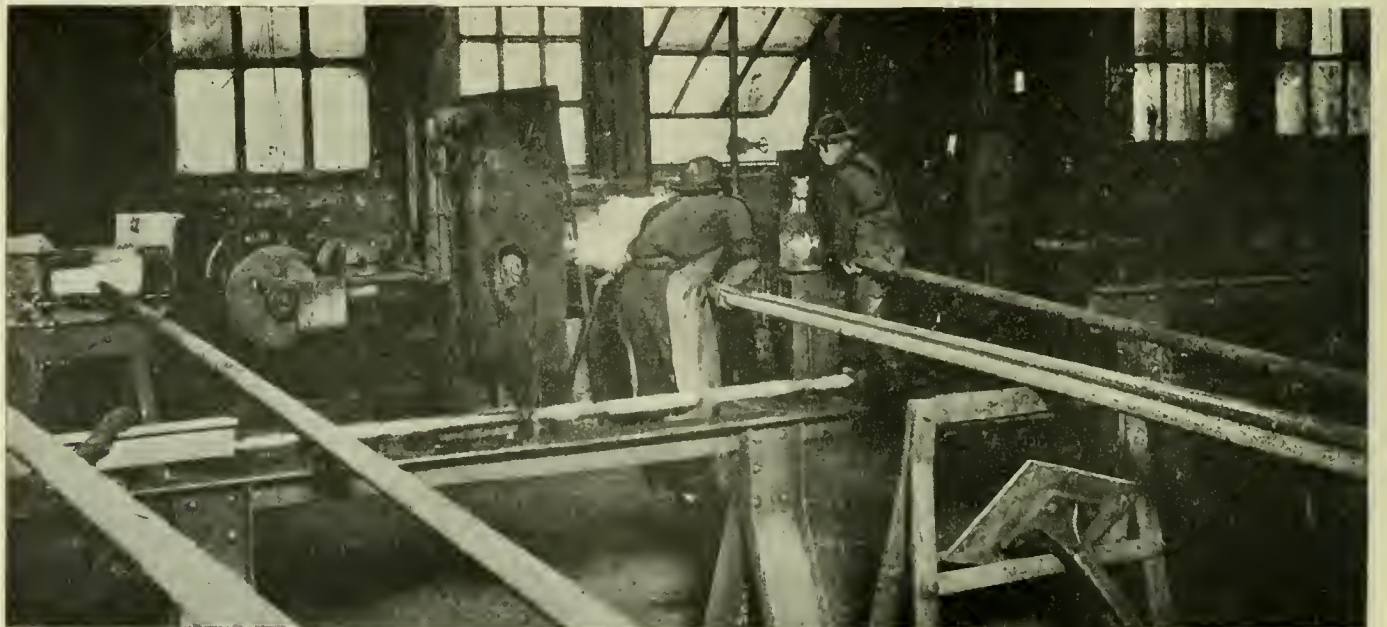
The Entire Safe Ending of Boiler Tubes Is Carried Out on the Equipment Here Shown To Cut the Tubes to Length an Additional Heating Furnace and Combination Hot Saw and Expanding Machine Are Used
